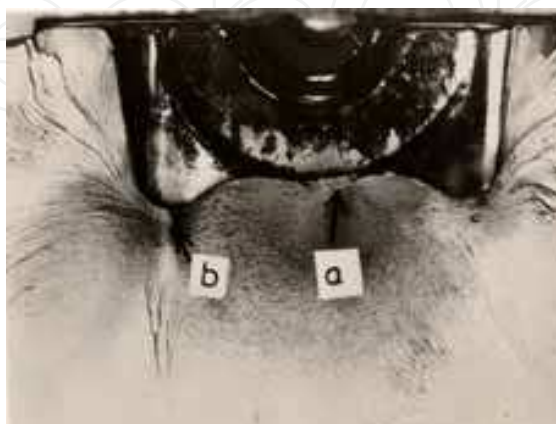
Macroscopic fracture surface of a knuckle forging die for a motor vehicle [1]. Arrow a and b shows crack initiation area respectively. Forging die steel: SKD62
